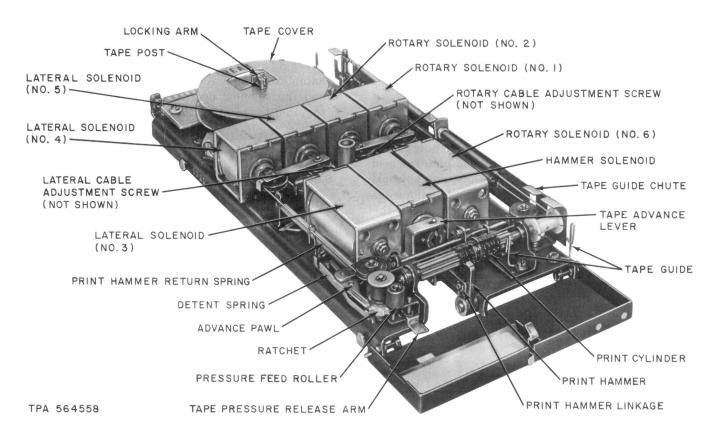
KS-19717 L6 Tape Printer—Cover Removed
